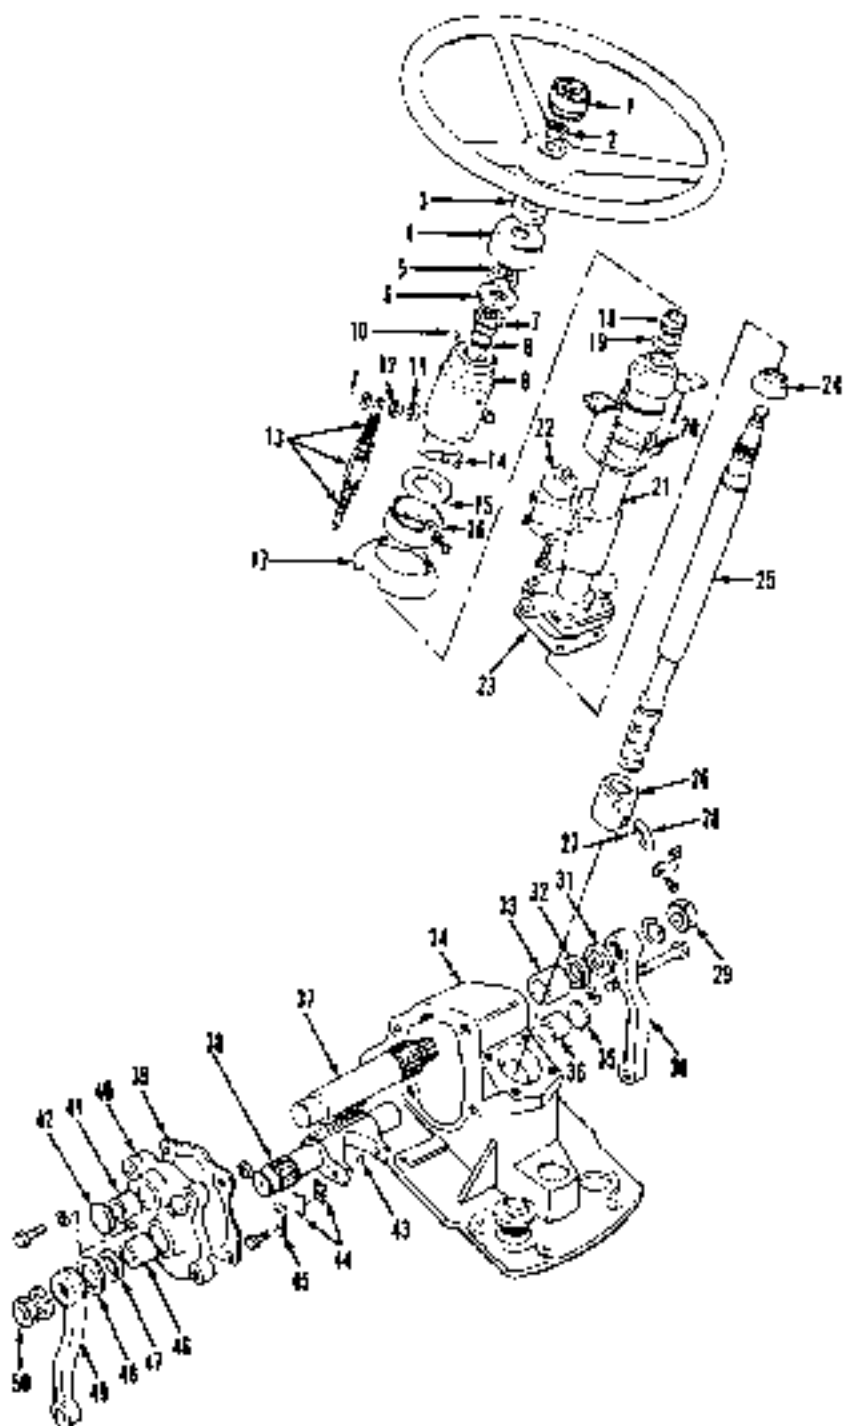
Exploded view of steering gear assembly used on Models MF240 and MF250.
